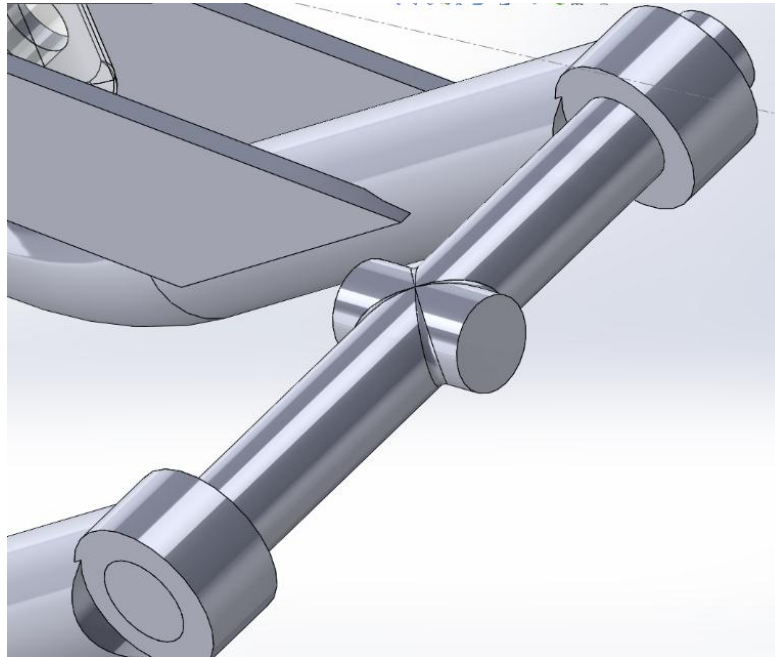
Cylindrical extrusion attached to the front wheel spindle
